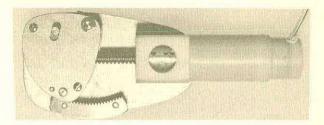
Figure I. New drive mechanism and torque converter assembly weighing 103 gm.
